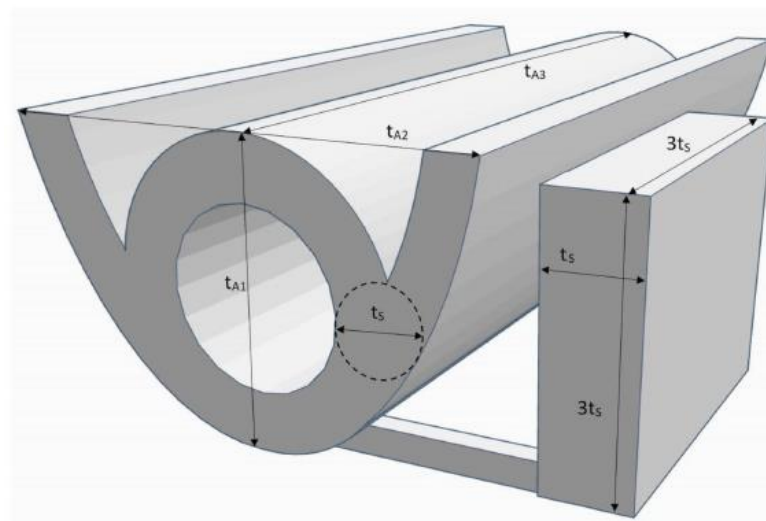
Example 2-Test block gated to stern tube casting
